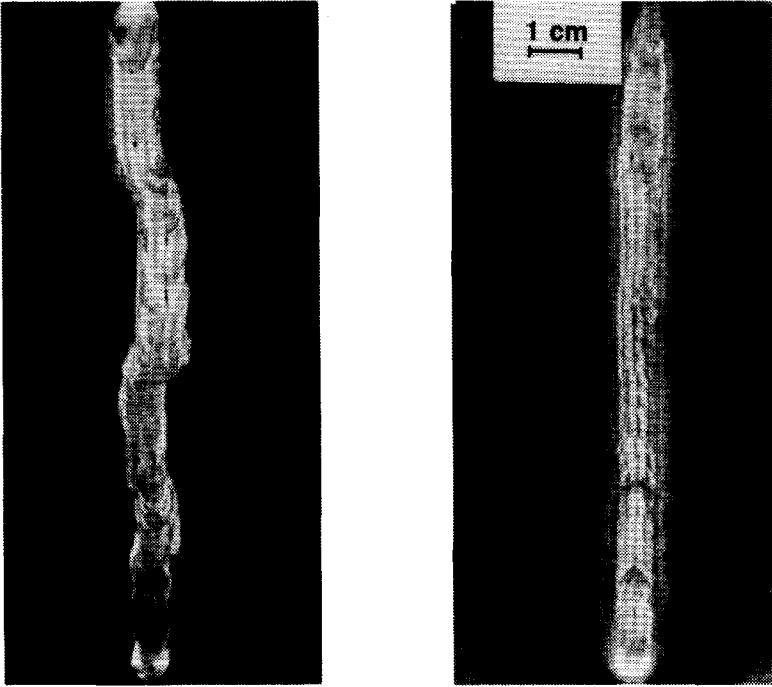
Weld beads produced at elevated pressure.
